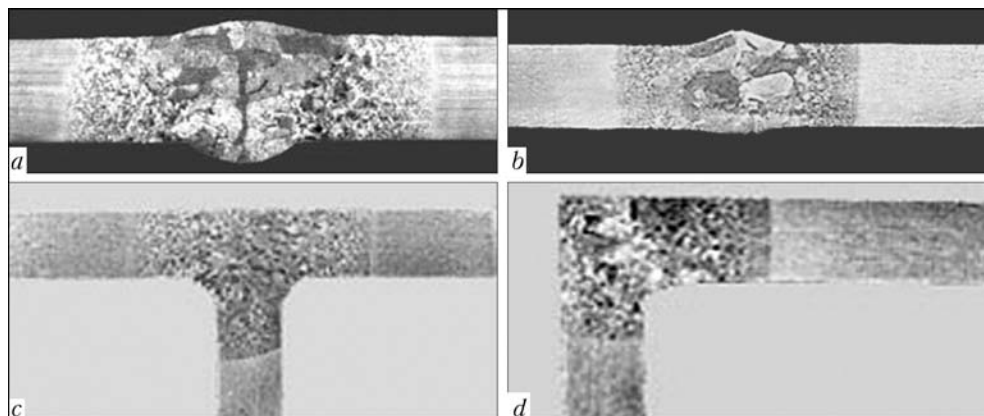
Macrostructure of TIG-F welded joints: a, b — butt joints 6 mm (flat position) and 3 mm (vertical plane) thick, respectively (alloy OT4); c, d — T- and fillet joints, respectively, with elements 3 mm thick (alloy VT6)
